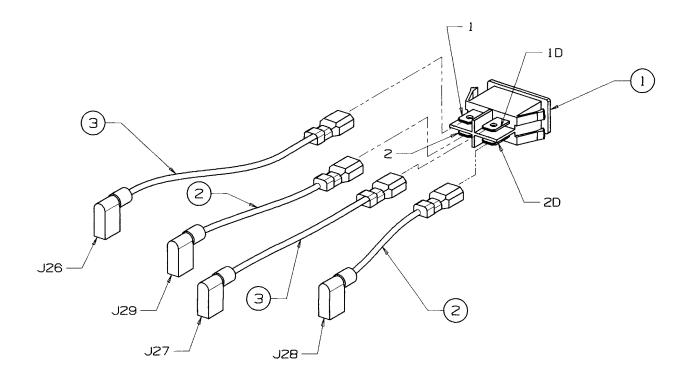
CE4000 Power Switch Assembly (Exploded View)
